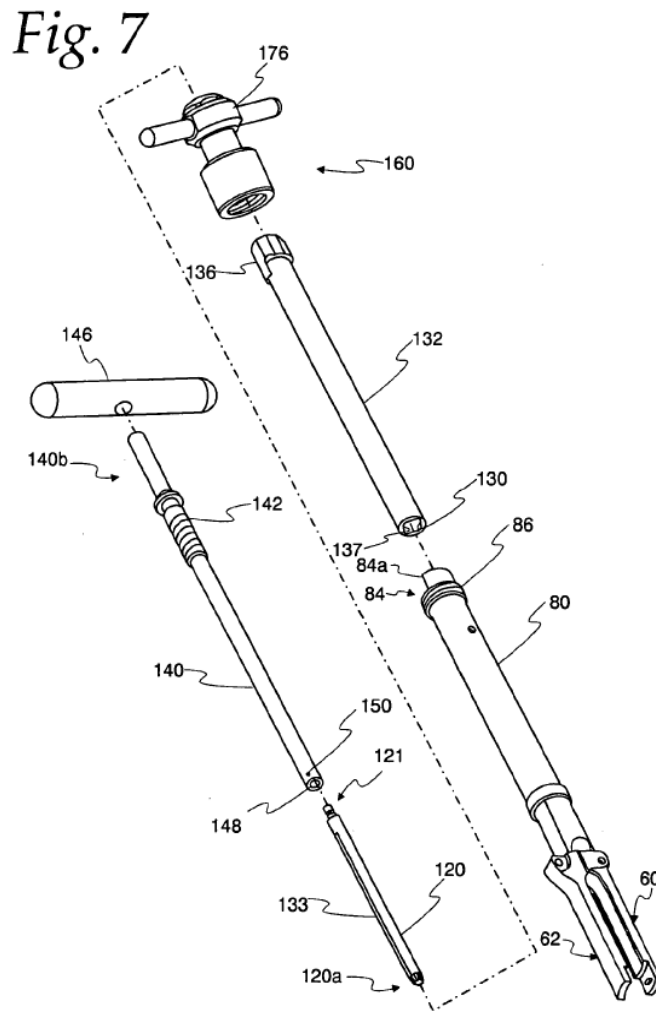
is “a partially exploded perspective view of the main body showing a sleeve coupling subassembly, a drive rod subassembly, a drive sleeve, and a tubular body portion of the surgical apparatus.” *Id.* ¶ 14.
